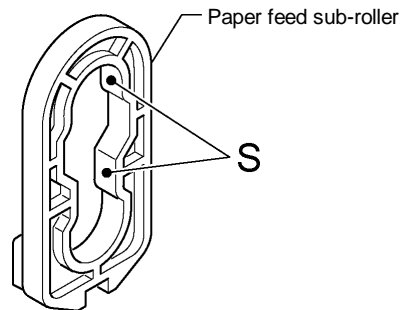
Sliding Surfaces of Paper Feed Sub-roller Shaft Holder Shafts
